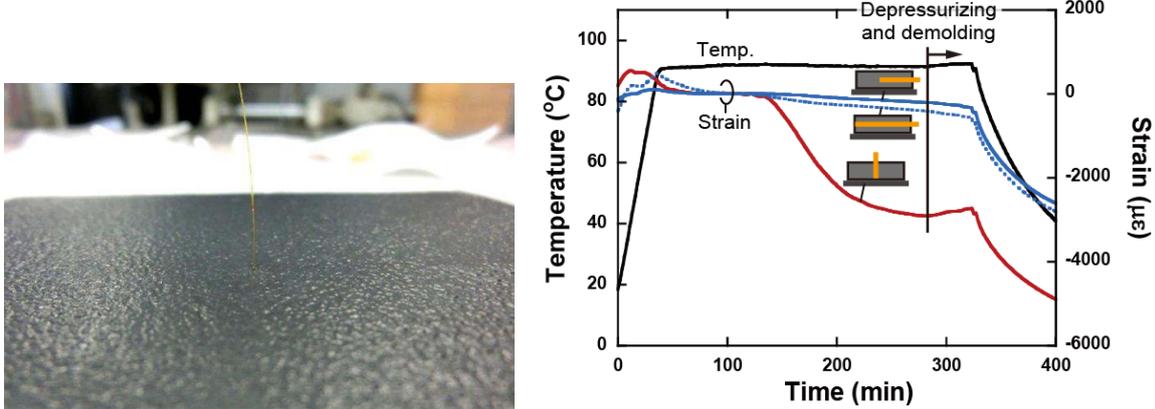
(Left) Surface of specimen with through-thickness sensor. Optical fiber is extending perpendicularly from surface. (Right) Transversely anisotropic shrinkage of unidirectional carbon/epoxy induced due to tool-part interaction. Measurement under practical curing condition is possible with this approach [9].
